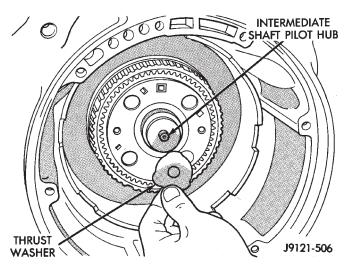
Removing Intermediate Shaft Thrust Washer—46RH
